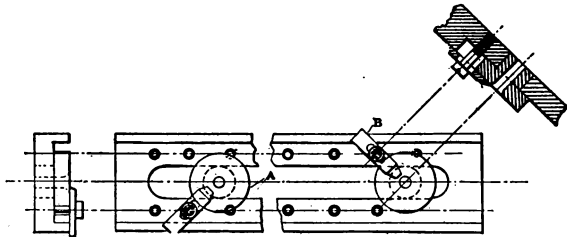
Another Fixture for Locating Holes in Jigs.
